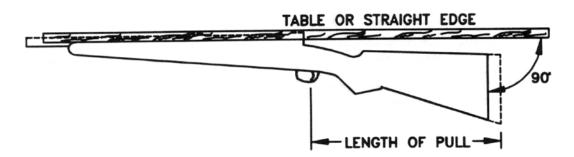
When cutting a rifle stock for the installation of a recoil pad, the cut should be made exactly 90° to the rifle bore.
